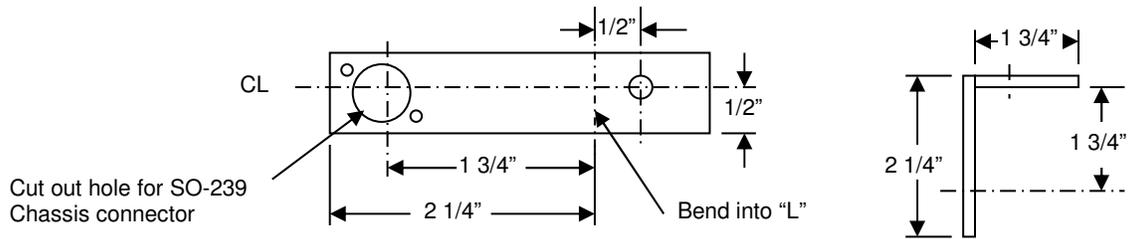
This illustration shows details to fabricate the Gamma match assembly.
